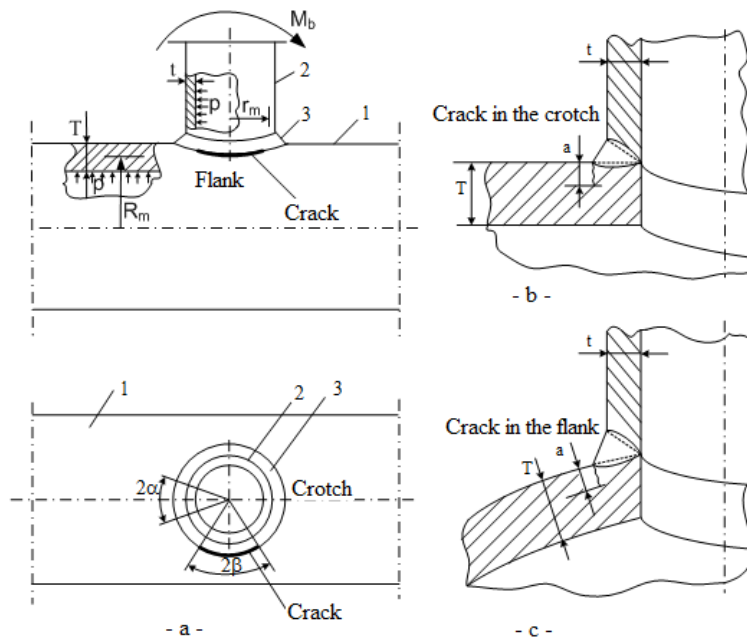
A branch with a crack in the lower weld toe: 1 – run pipe; 2 – branch pipe; 3 – weld.
